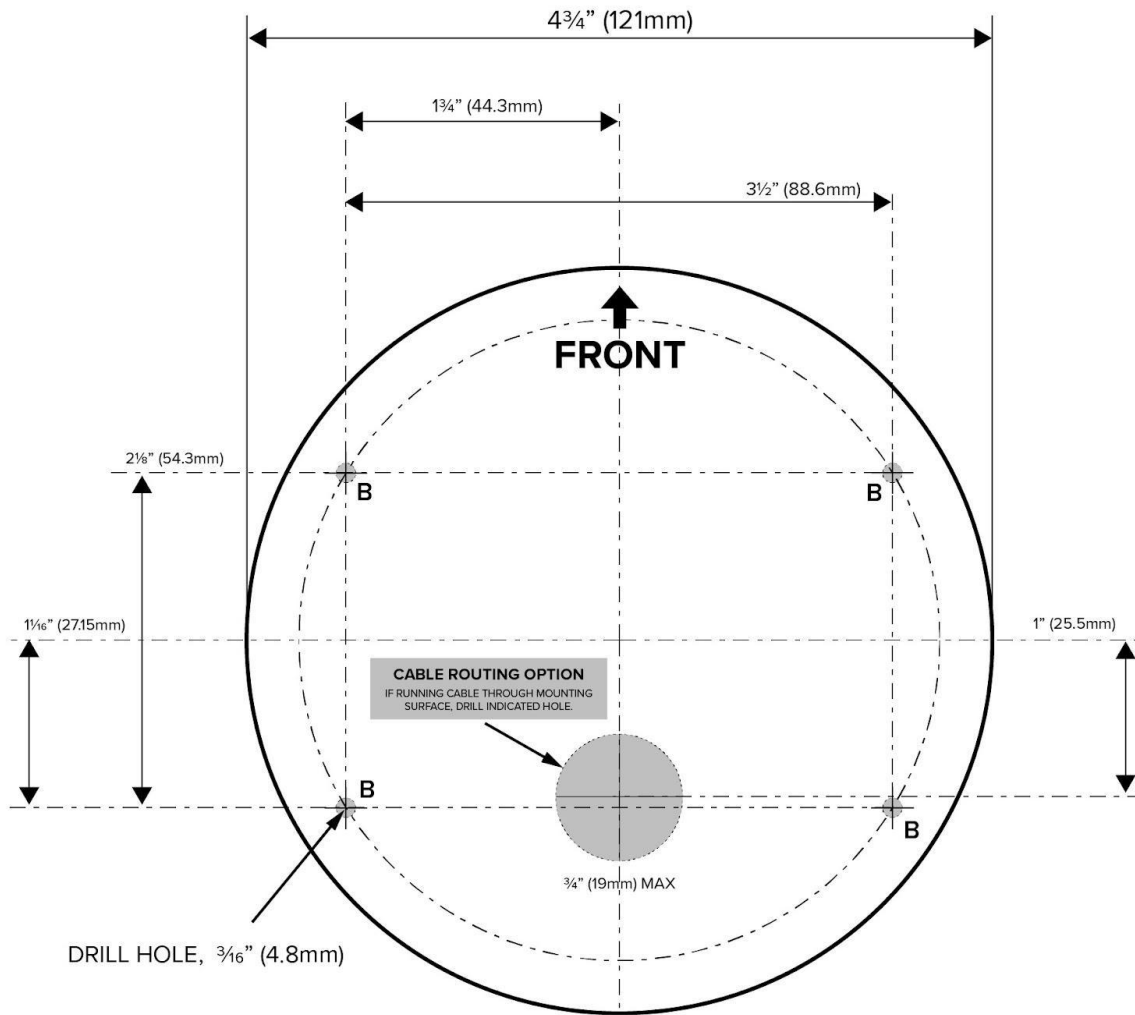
Mounting Hole Dimensions- Screwing into Floor Diagram
